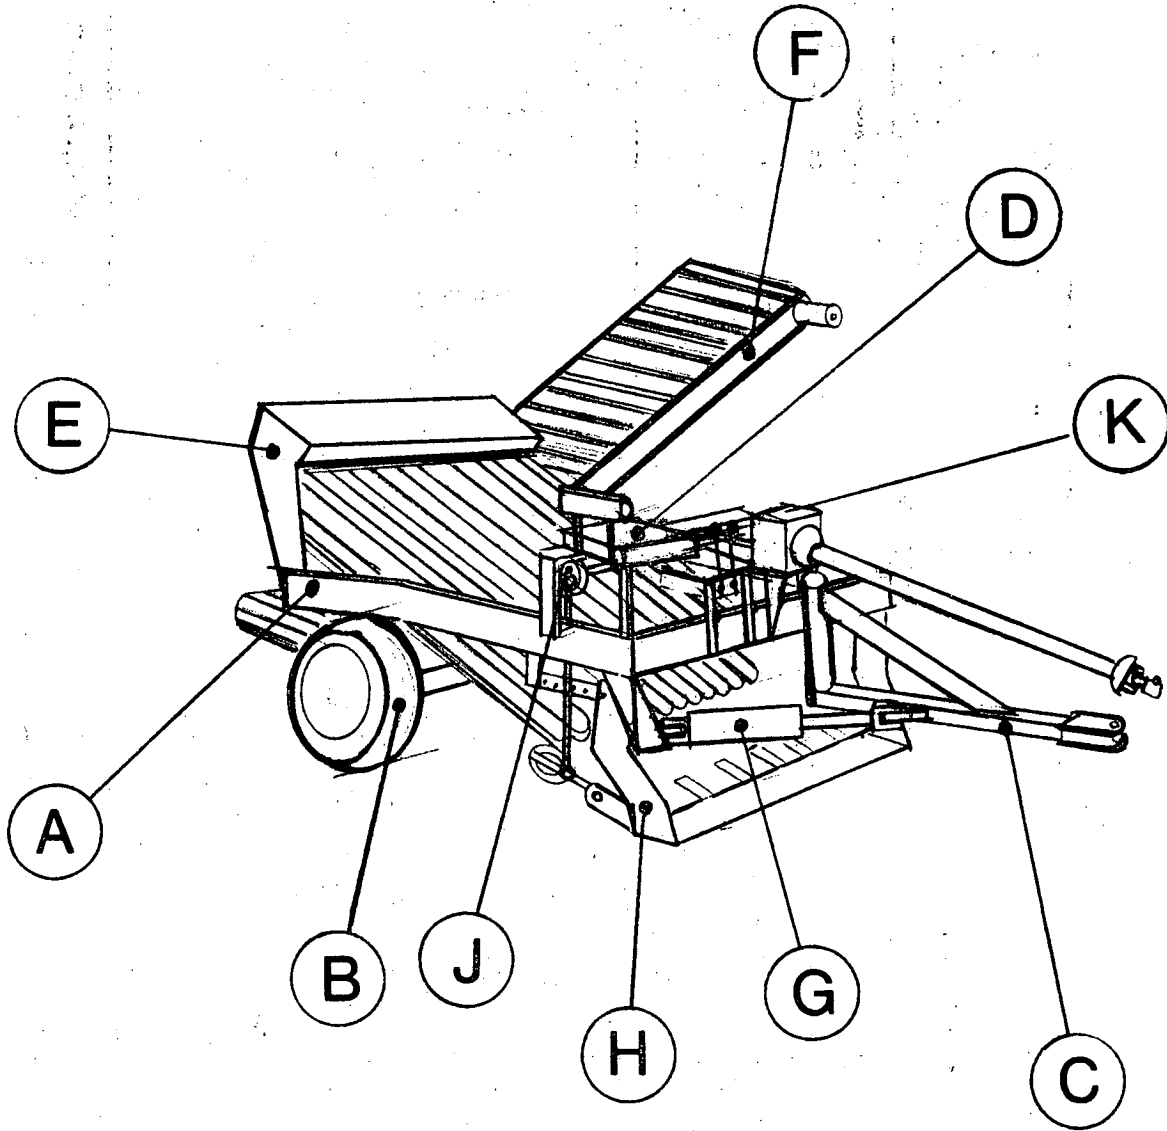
Main components of the harvester. A. Main frame; B. floatation tires; C. steerable tongue; D. operators station; E. belt frame; F. rear elevator frame; G. hydraulic cylinder for tongue steering; H. under-cutting blade; J. shaker drive; K. gearbox and universal joint drive.
